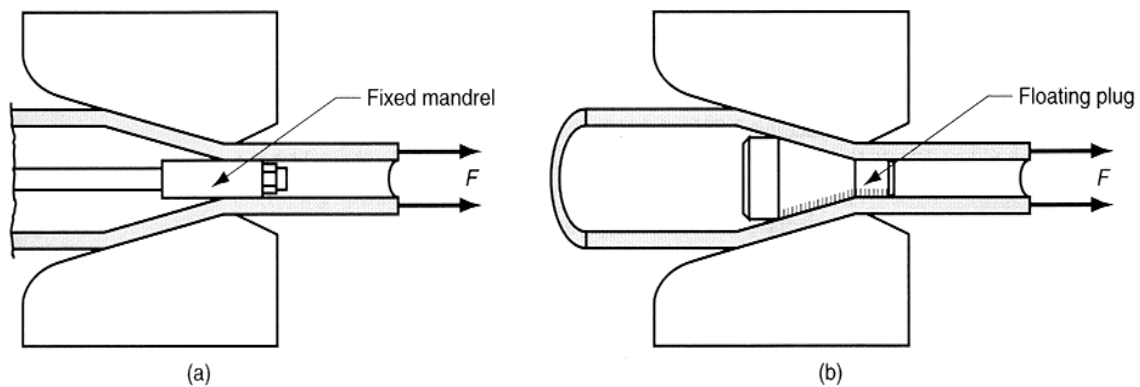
Tube drawing with mandrels (a) fixed mandrel and (b) floating plug [18].
